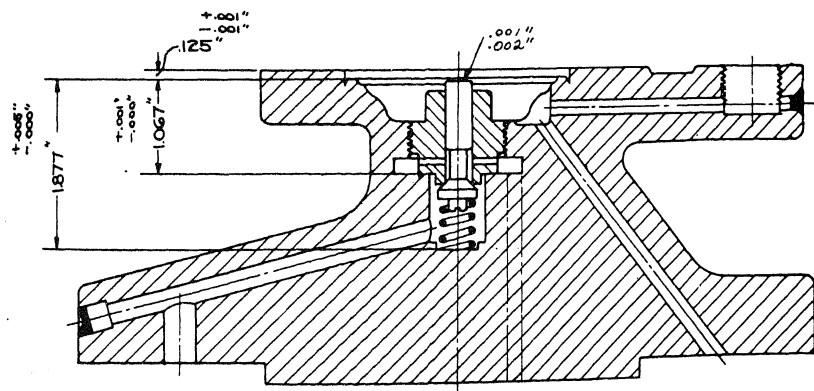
Important points in cleaning and reassembling a top cap assembly.
